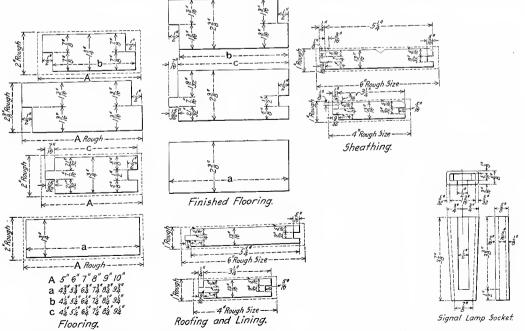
M. C. B. Standard Flooring, Sheathing, Roofing and Lining. (M. C. B. Sheet 26.)
